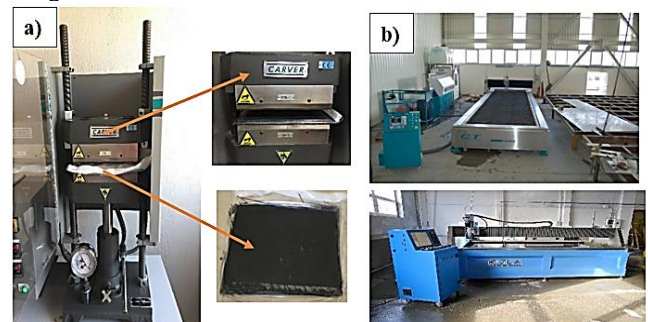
a) Adjustable hot press machine b) CNC Water Jet Siemens a3216 R-HP
